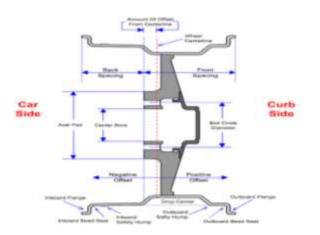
wheel features and dimensions of a typical wheel Source: [15]
